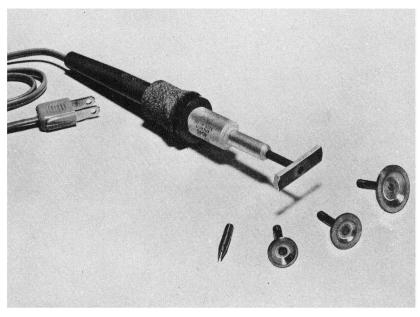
Interchangeable tips are designed for unsoldering components from printed-circuit boards. (Ungar Electric Tools)
